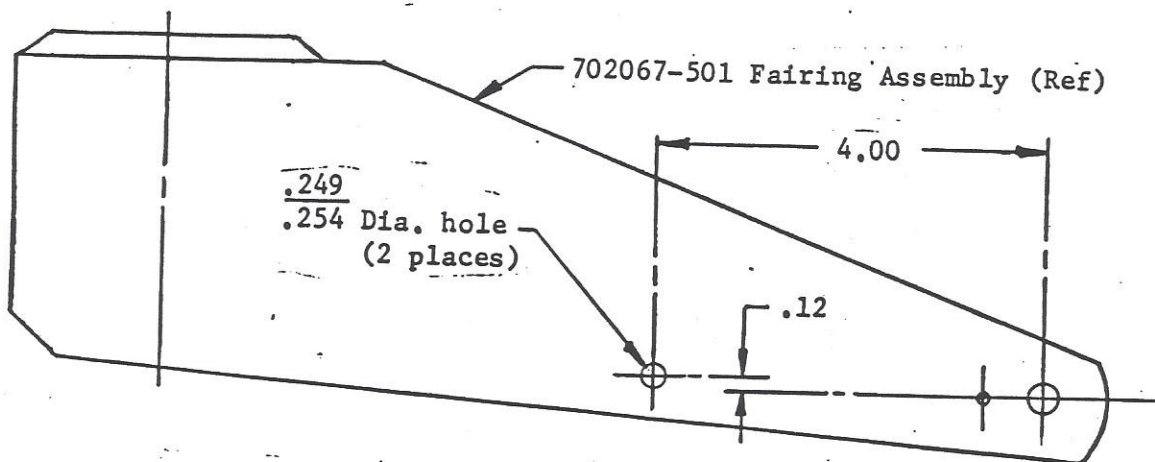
FAIRING ATTACHMENT HOLE LOCATION
